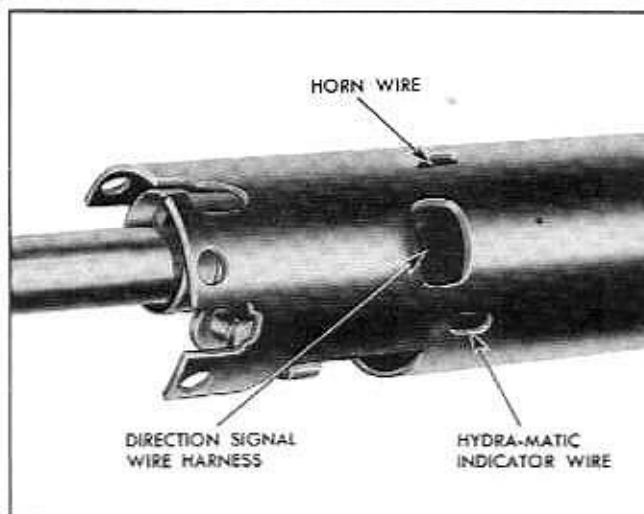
Openings for Wiring in Steering Column Jacket
